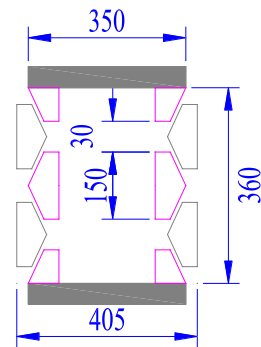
Schematic illustration of the SMA ring spring dimensions (units: mm)
